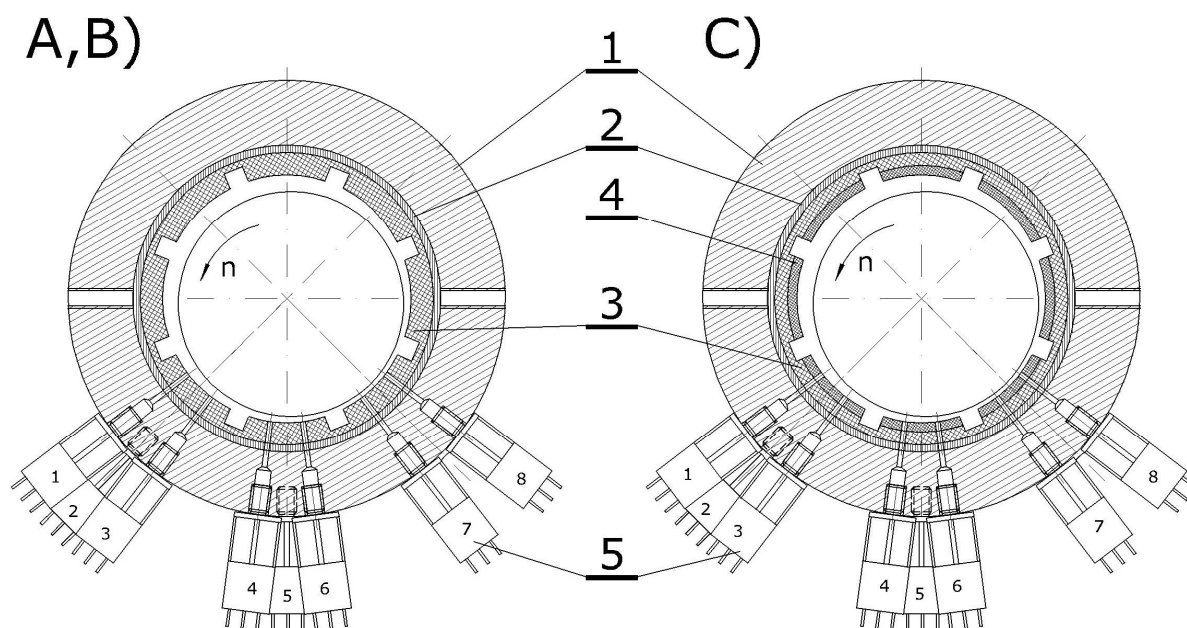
Tested bearings; A, B - rubber bearings (NBR), C- three layer bearing PTFE - NBR bronze, shown locations of sensors measuring pressure in lubrication film; 1 - steel sleeve, 2 - bearing steel sleeve with a factory mounted bearing, 3 - NBR, 4 - PTFE layer, 5 - pressure sensors (in two groups of eight)
